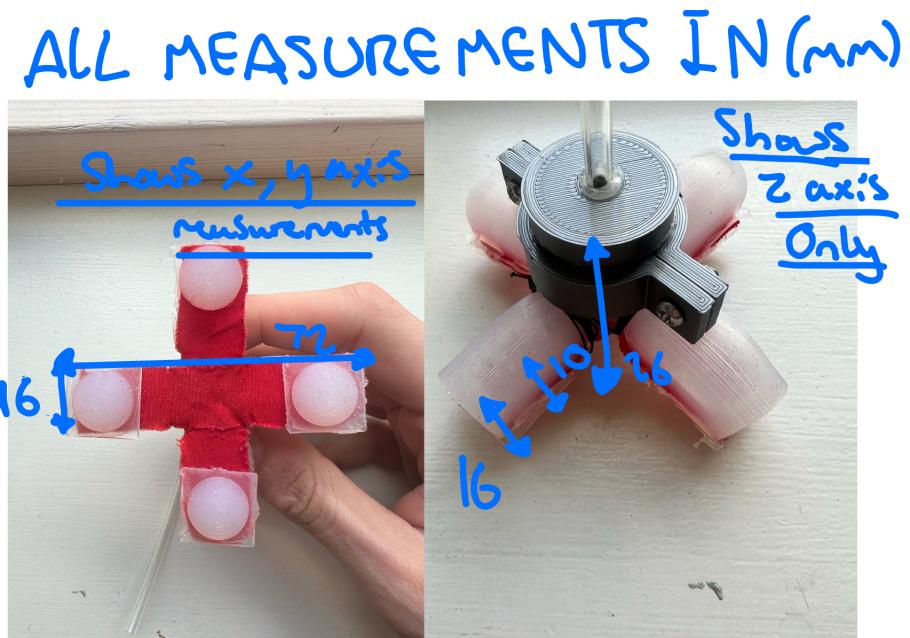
Shows detailed dimensions of gripper fabricated in mm.
